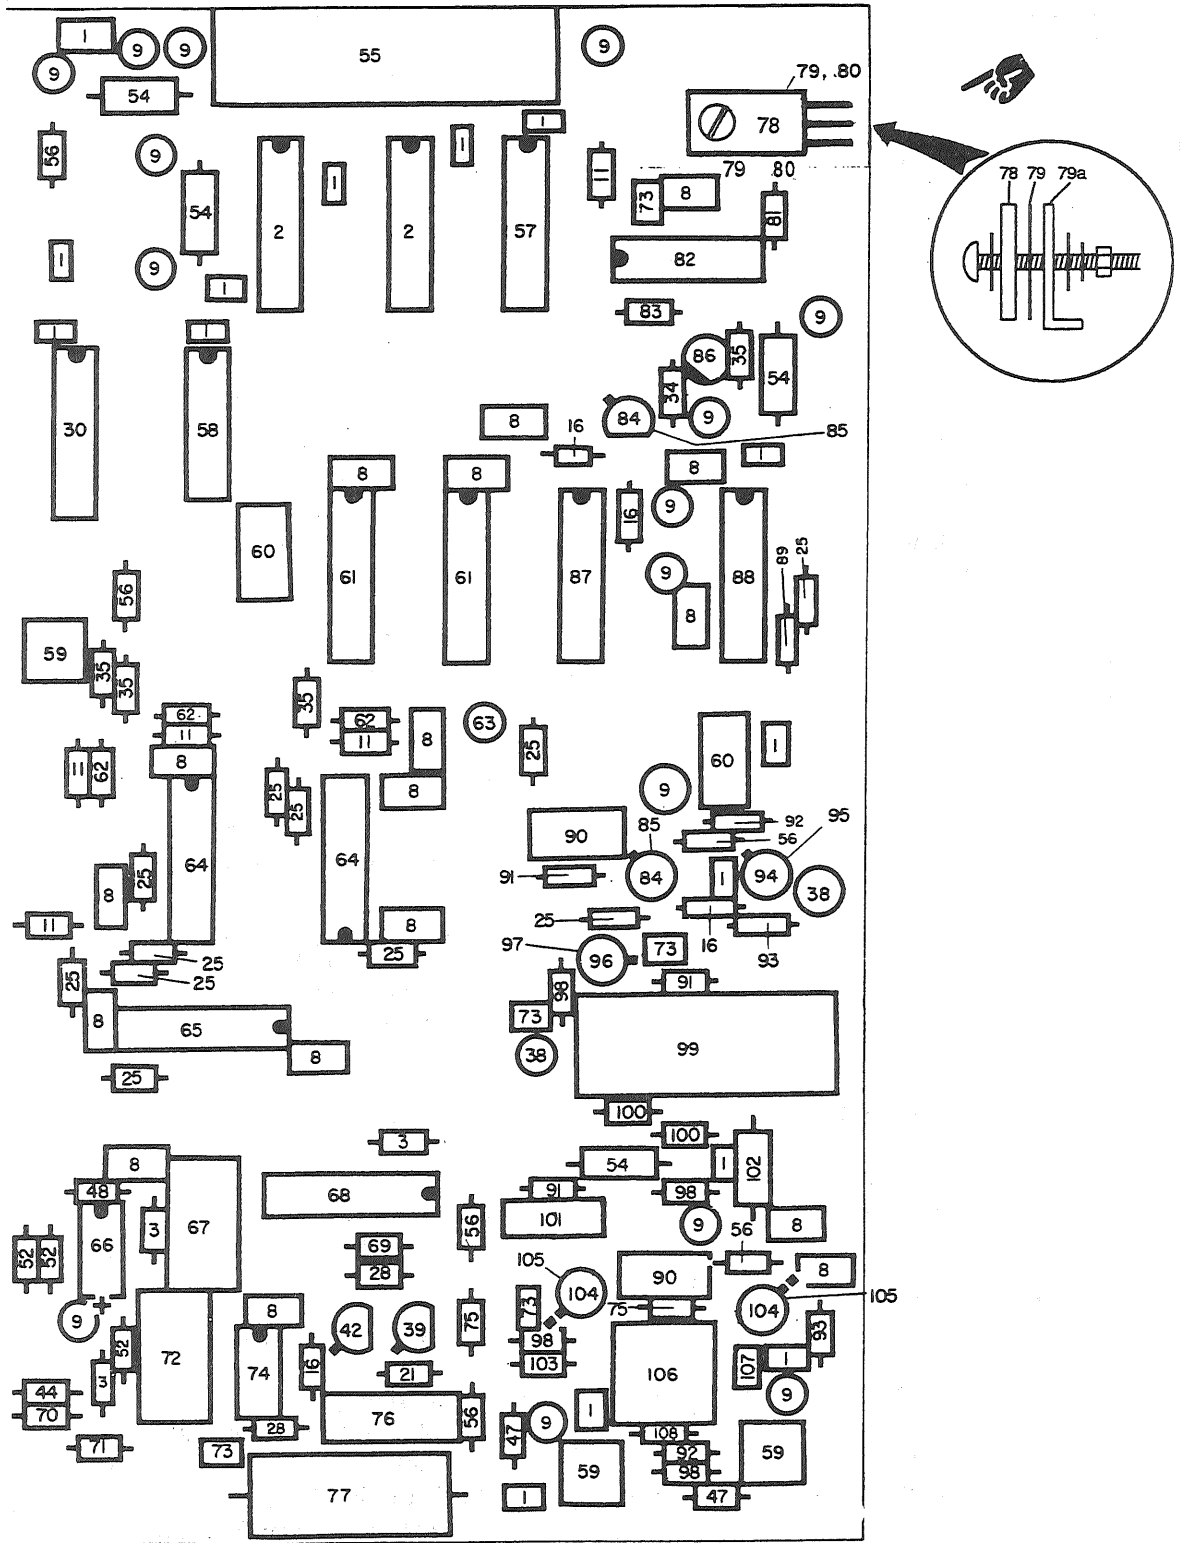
First L.O. Synthesizer Assembly. Circuit Card. A7 (Sheet 2 of 2)
